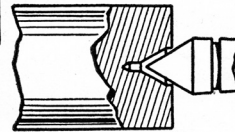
An incorrect center hole, drilled too deep to fit center.
